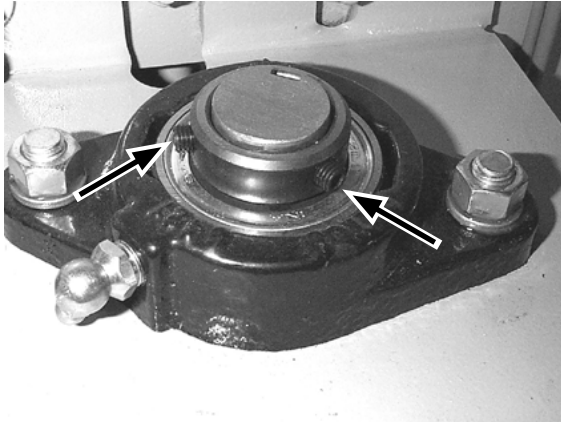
Make sure the setscrews are sufficiently tightened.
